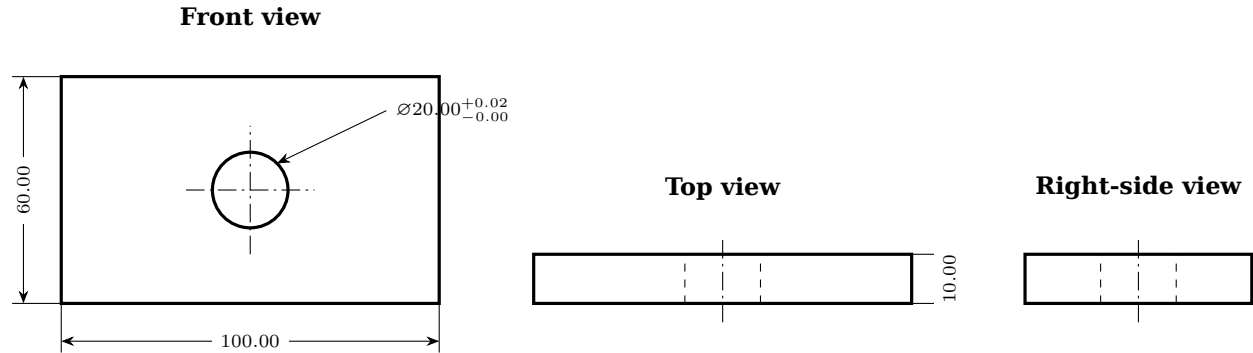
Orthographic drawing of a rectangular plate. The front view shows the plate length, width, hole diameter, and centerlines. The top and right-side views show plate thickness and hidden edges of the through-hole.
